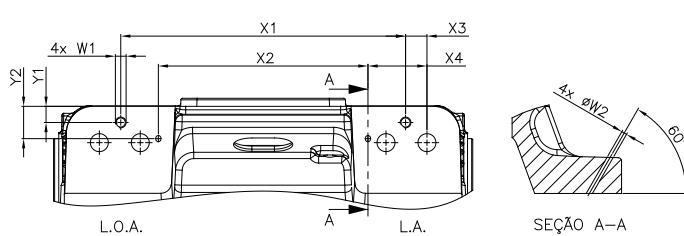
Dimensions for motors with jacking screws and dowel pins
